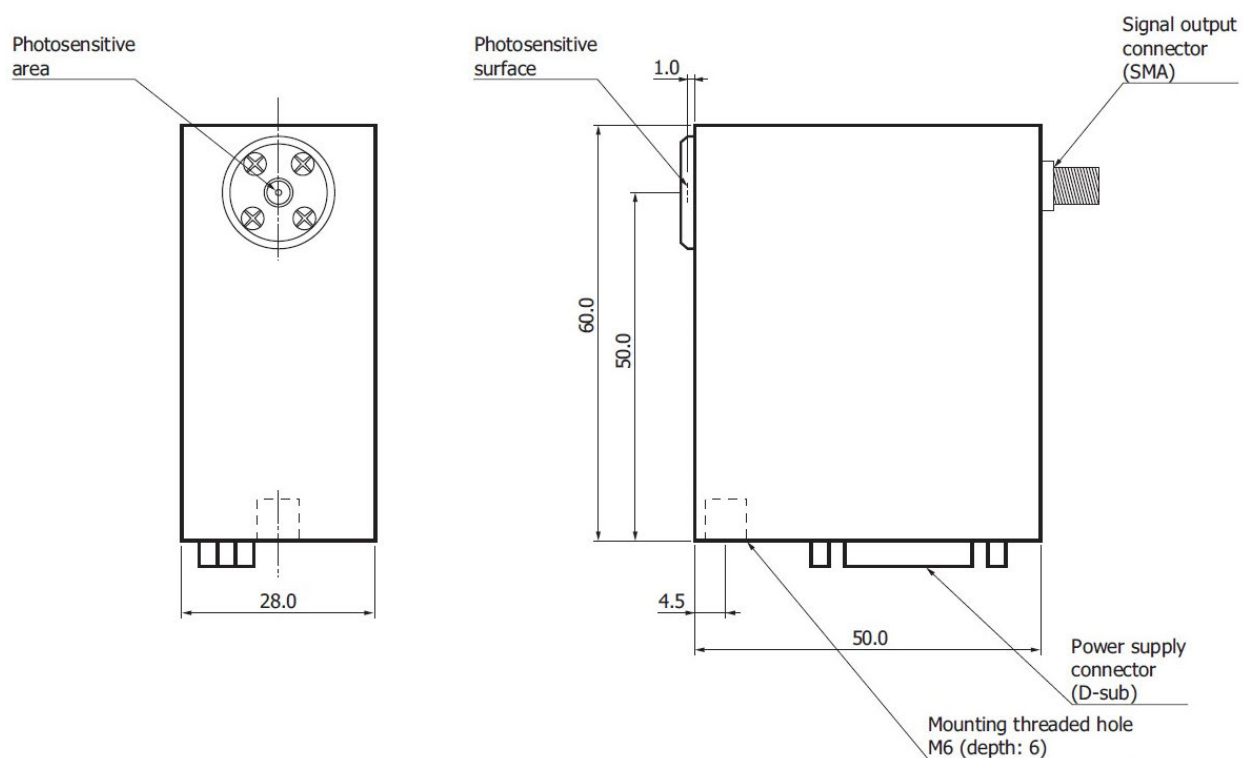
Dimensional drawing of the APD module. All dimensions are in mm.
